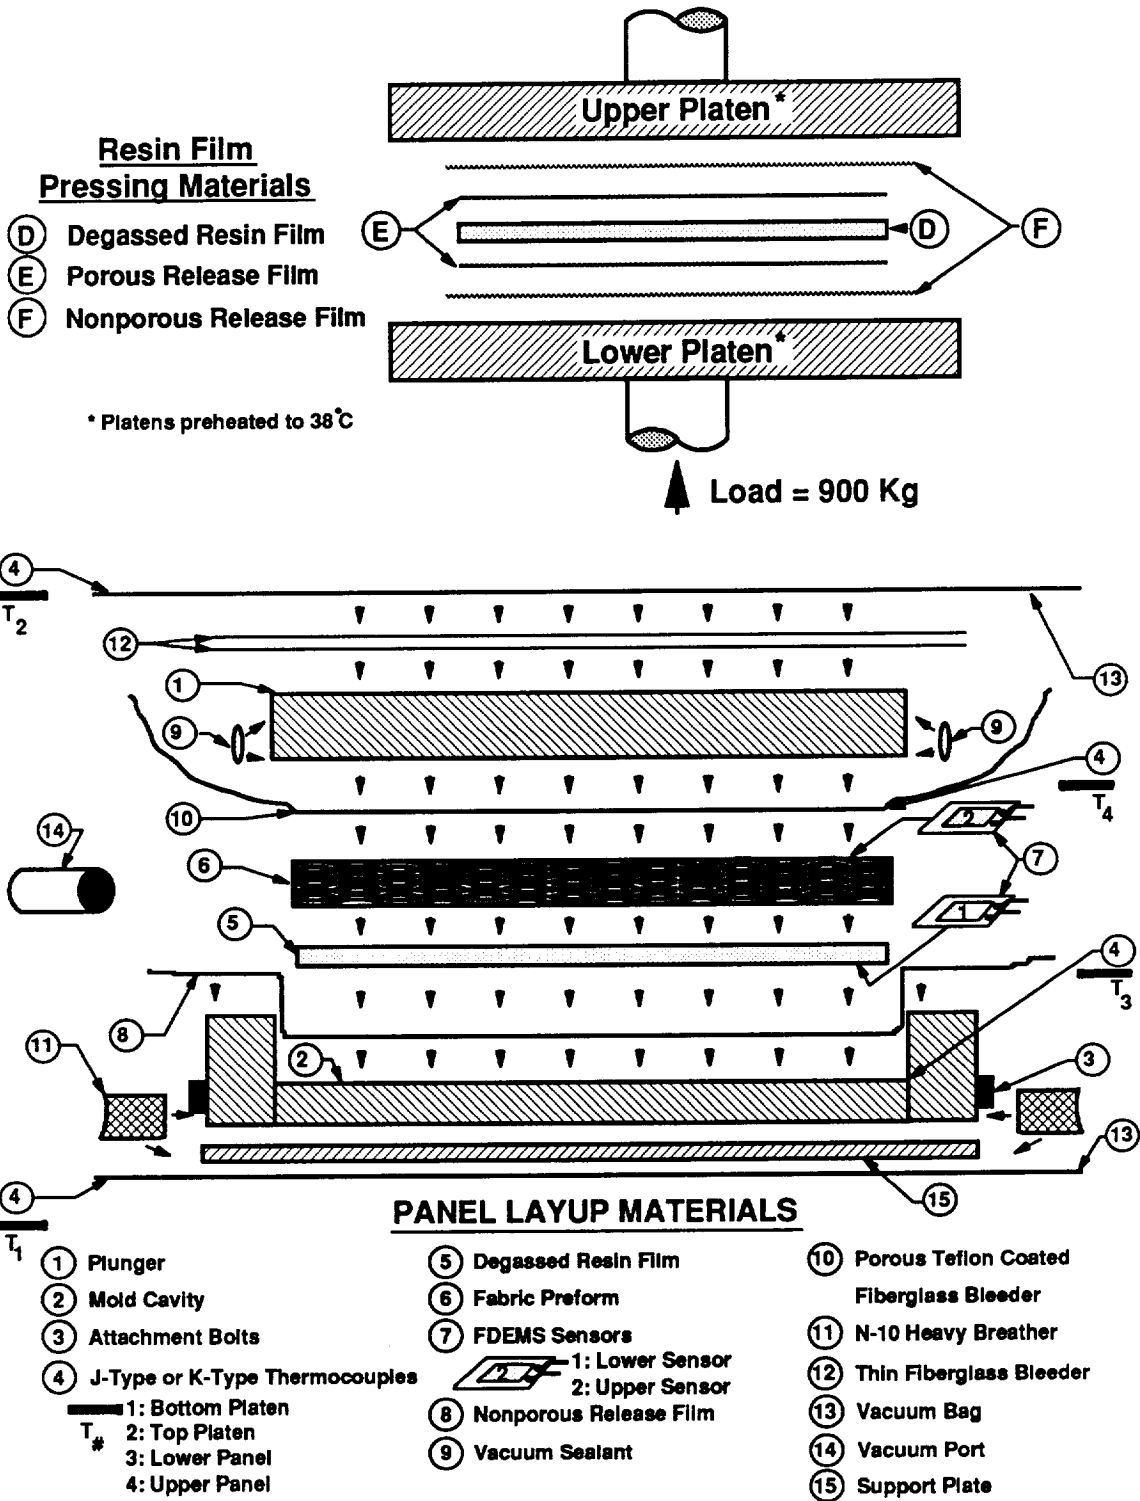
Schematic of the assembly to press the degassed resin film to a desired thickness (top) and the general RTM layup assembly (bottom).
